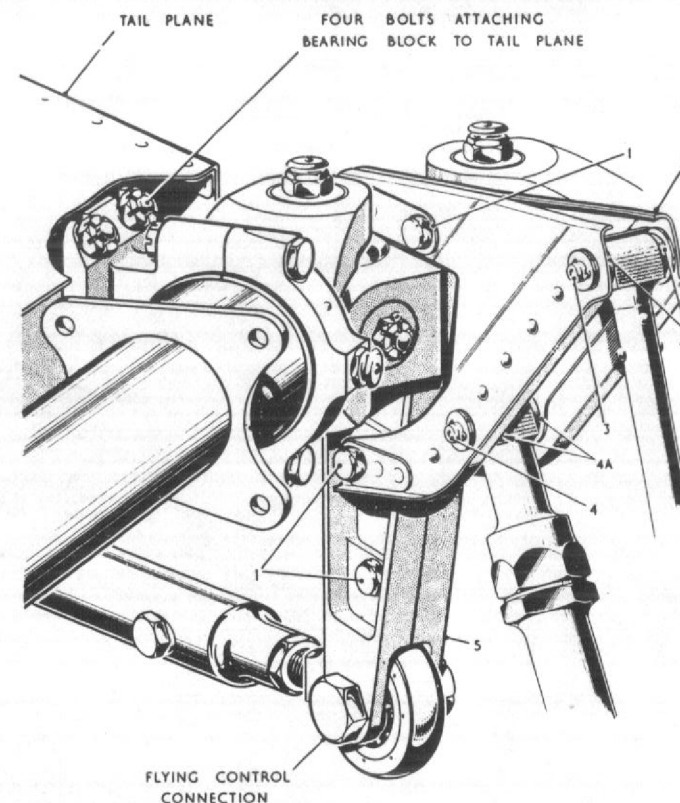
Split lever connecting port and starboard elevators and inner hinge bearing
